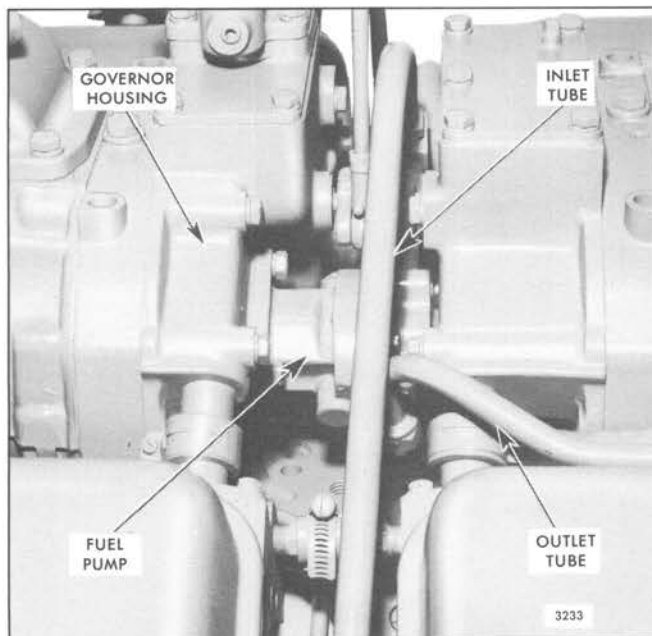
Typical Fuel Pump Mounting (16V Engine)
